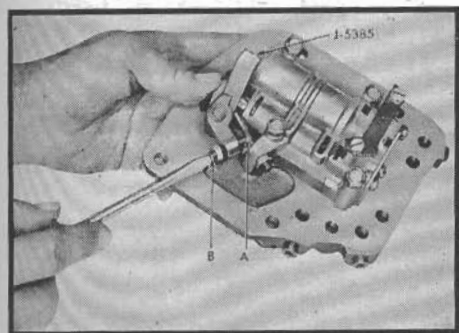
Setting (2) of throttle valve inner lever adjustment. 1953-59
